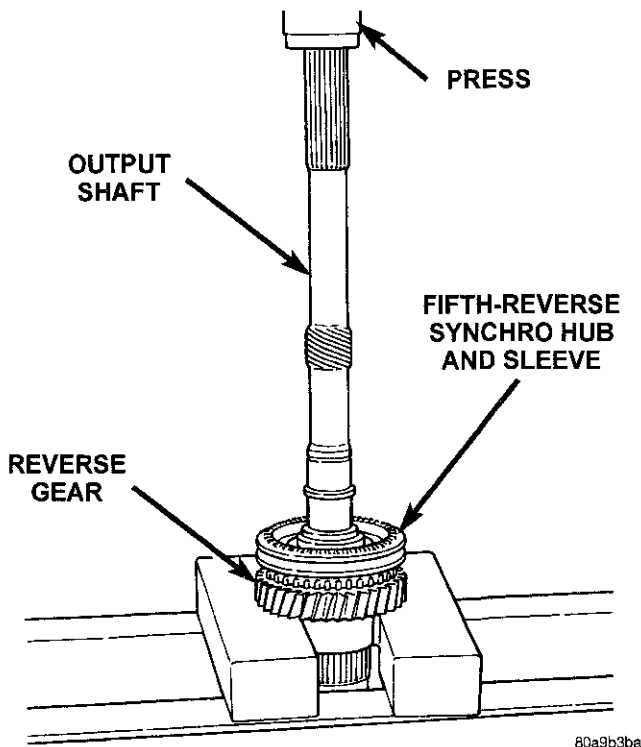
Fifth-Reverse Synchro Hub And Sleeve Removal
